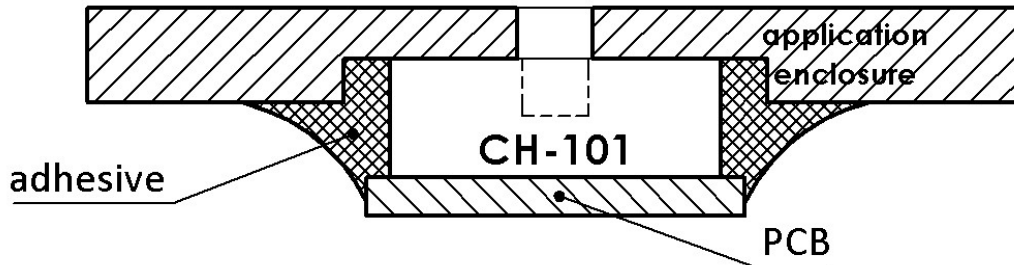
CH-101 attachment to product enclosure using liquid adhesive
